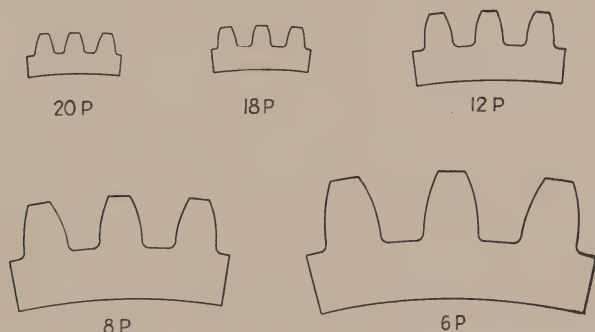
Shows relative sizes of gear teeth of five different pitches.
